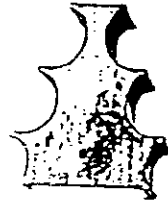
The dovetail shape, produced by an ECM generating tool, is typical of that used to secure airfoils to their rotors in both gas and steam turbines. A single tool, as shown, can machine to ± 0.0005 in. tolerance. If a secondary ECM operation is performed then tolerances of ± 0.0001 in. are possible. (Courtesy of the Cincinnati Milacron Company.)
